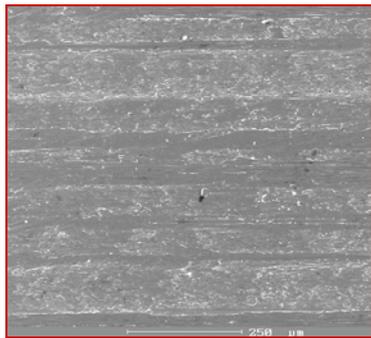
The machined surface morphology - the cutting tool HSCo, 8 % Co, TiAlN mag. 90x,  $v_c=50$  m/min,  $f=0,08$  mm, steel Cr20Ni8Ti
